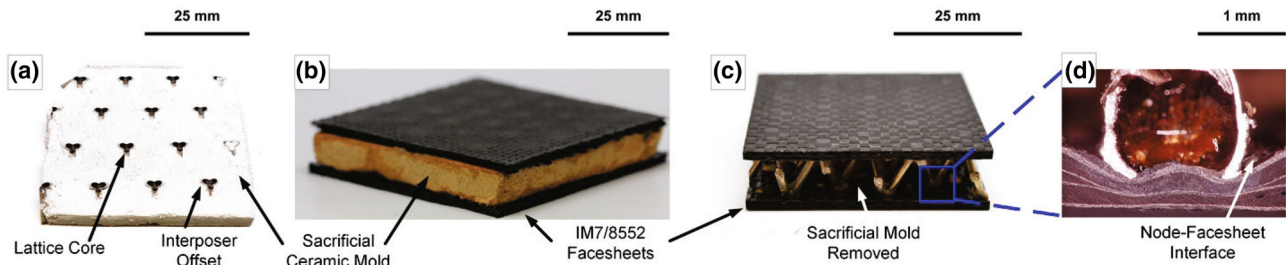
Demonstration of facesheet integration by co-curing: (a) sacrificial mold integrated in lattice core, (b) facesheet consolidation on mold/lattice, (c) mold removal, and (d) lattice core/facesheet interface.
